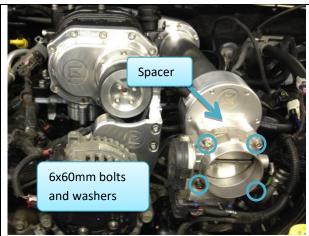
Throttle body properly installed with butterfly actuator on passenger side.
